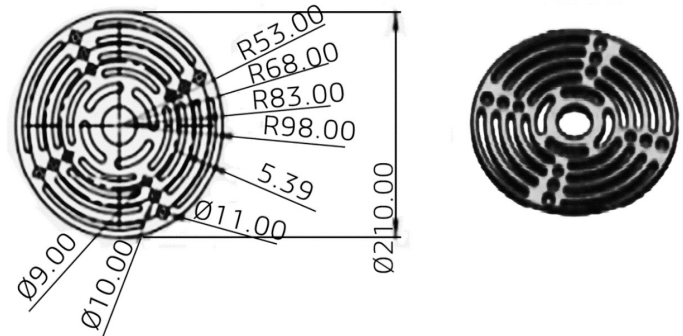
Compressor valve plate (i.e., shortly named as 'plate') drawn in SolidWorks
